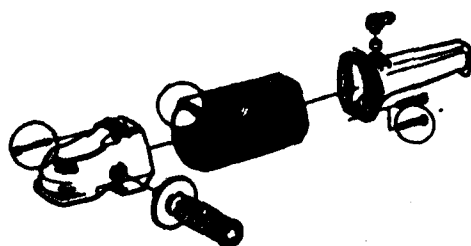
Not recycling construction design of the plastic housing for a grinder /1/ (thread hole torn out)
